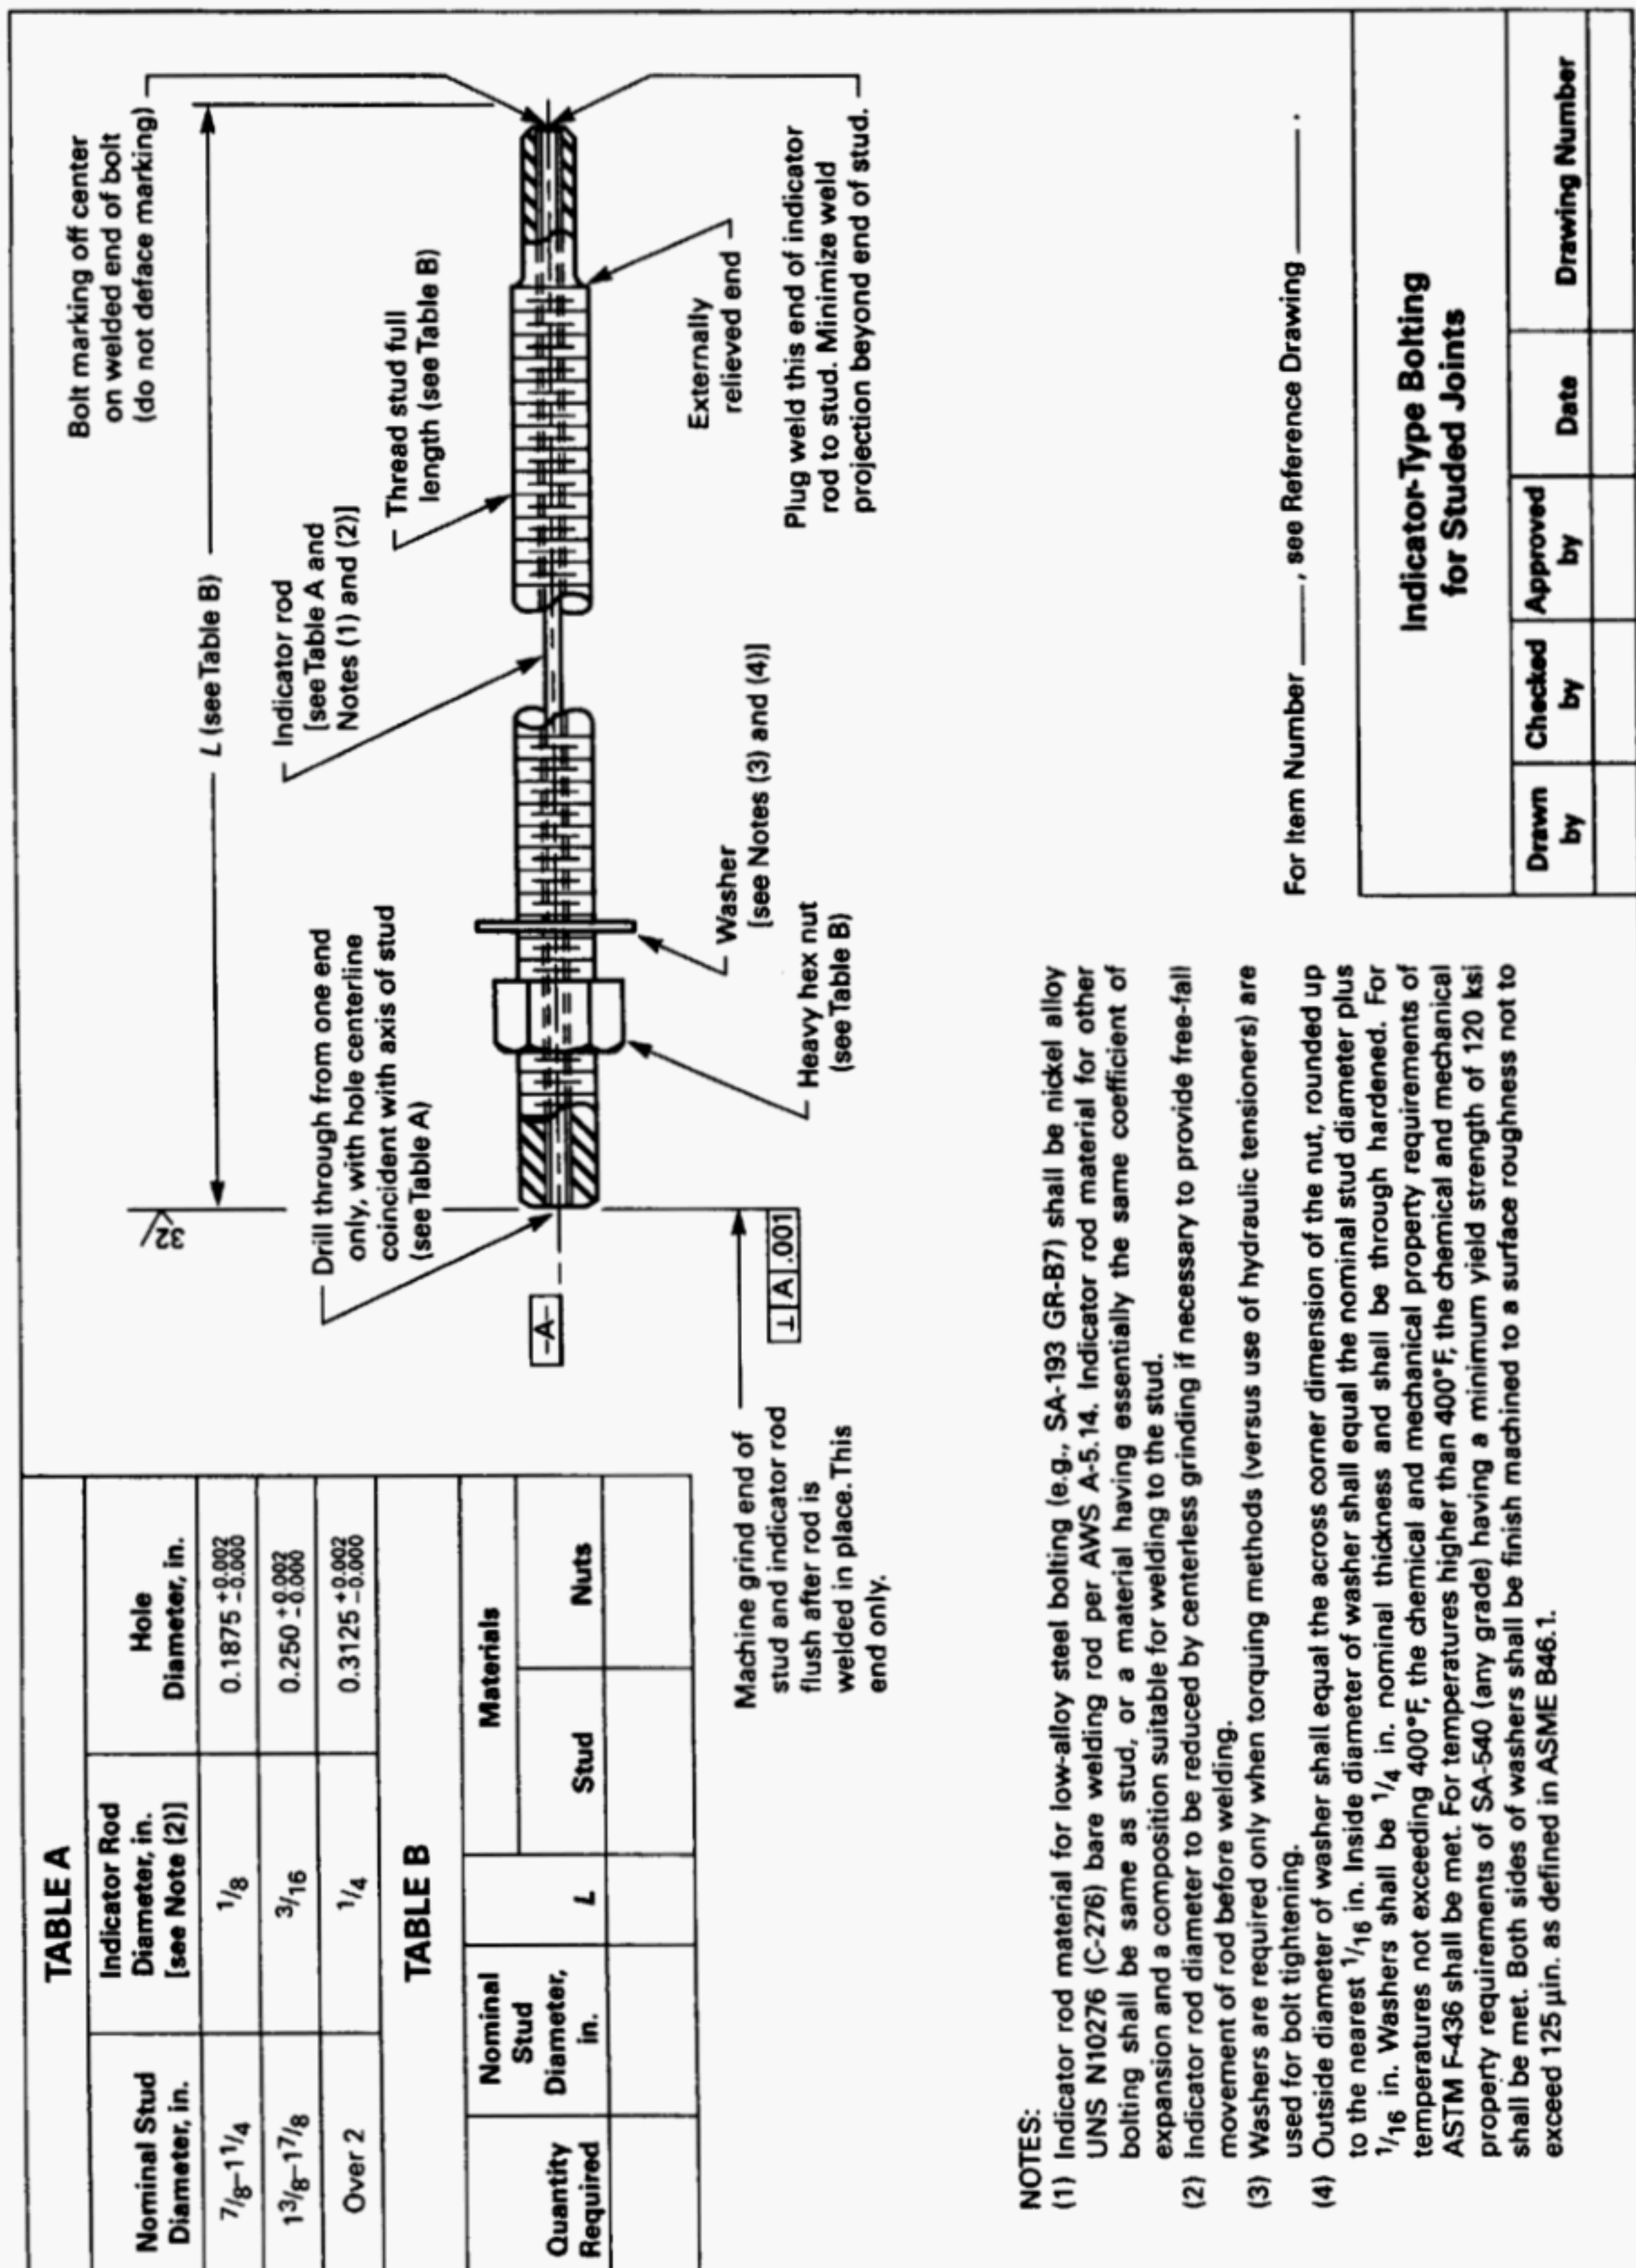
INDICATOR-TYPE BOLTING FOR STUDDED JOINTS
